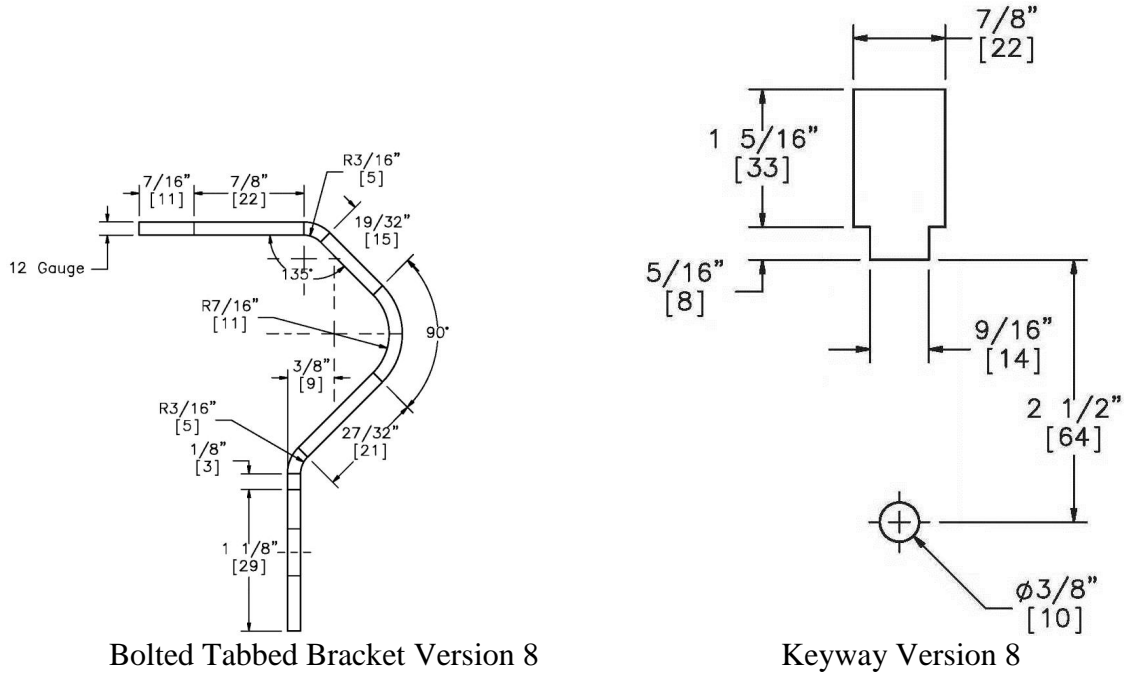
Bolted Tabbed Bracket Version 8 and Keyway Version 8
